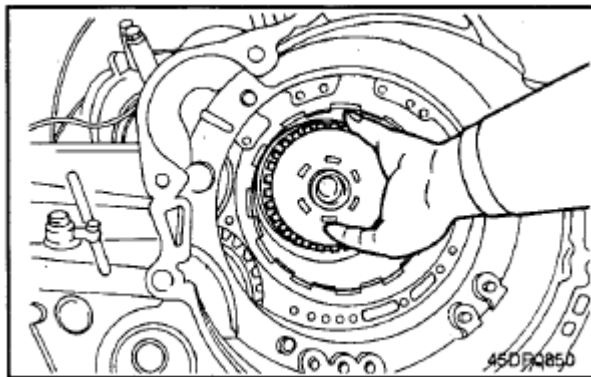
Installing Clutch Hub To Sun Gear Splines
